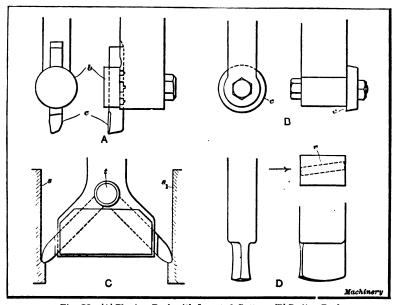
(A) Planing Tool with Inserted Cutter. (B) Radius Tool (C) Tool having Two Cutters. (D) Finishing Tool
